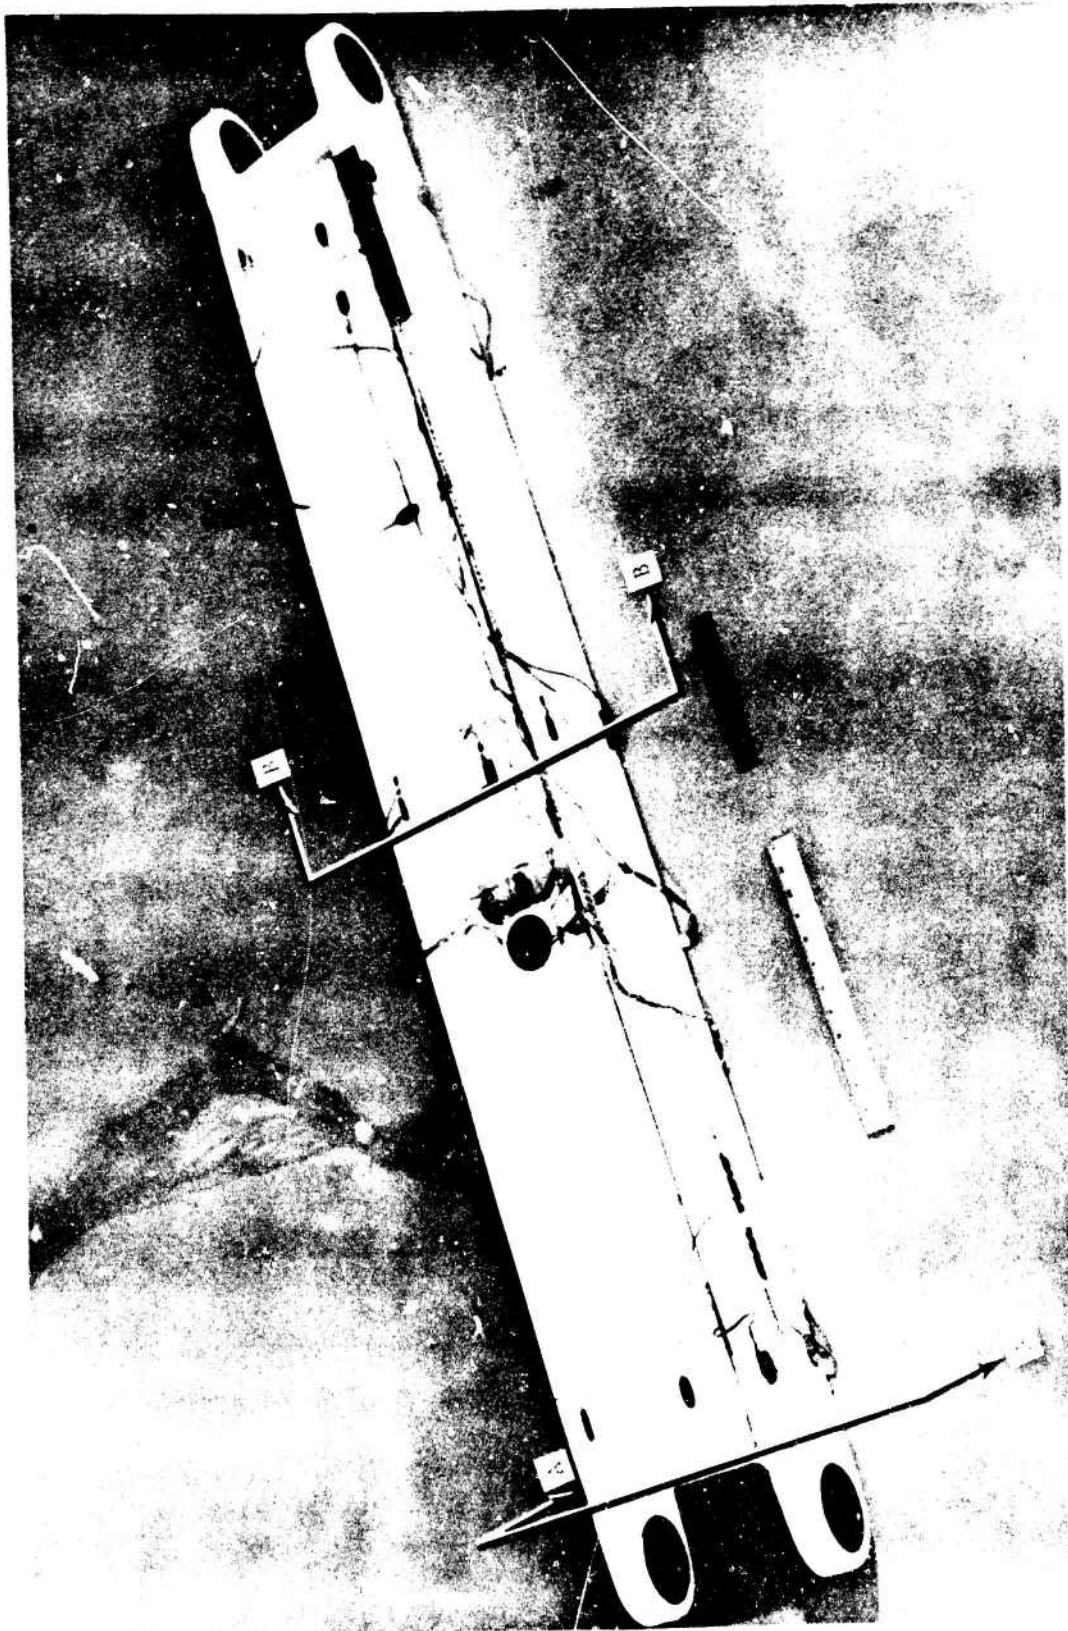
Detailed view of drag strut showing locations of view A-A (fig. 2b) and section P-P (fig. 2c).
